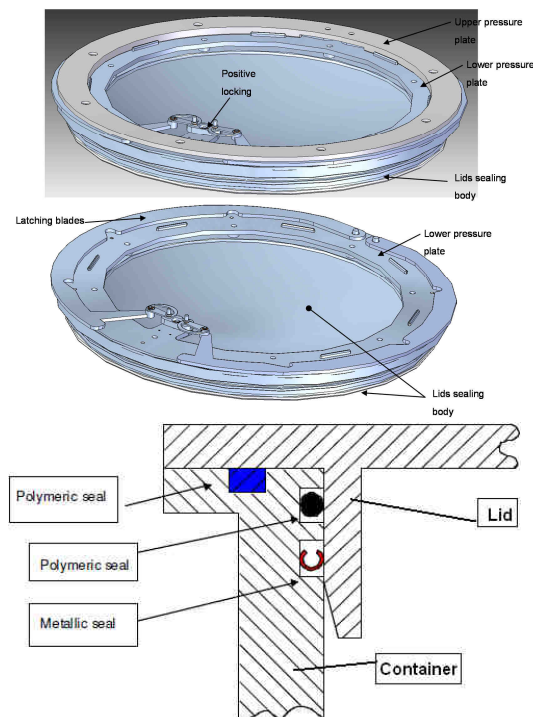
CAD drawing of one of the lid and a possible schematic for gasket placement
